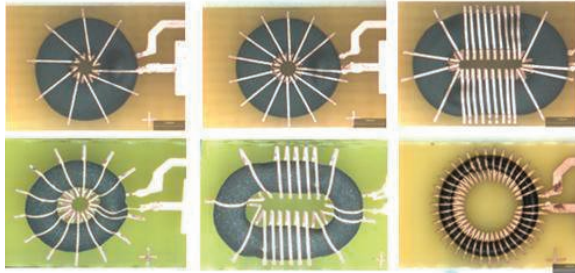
Toroidal core coils with Aerosol Jet® printed windings from nano Ag or Cu ink and dispensed ferrite core on PCB substrate [10]
